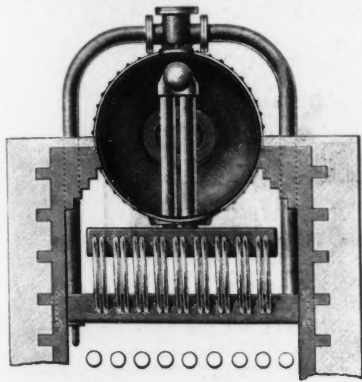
Cross-Section of Boiler and Setting, Showing Superheater in End Elevation.
